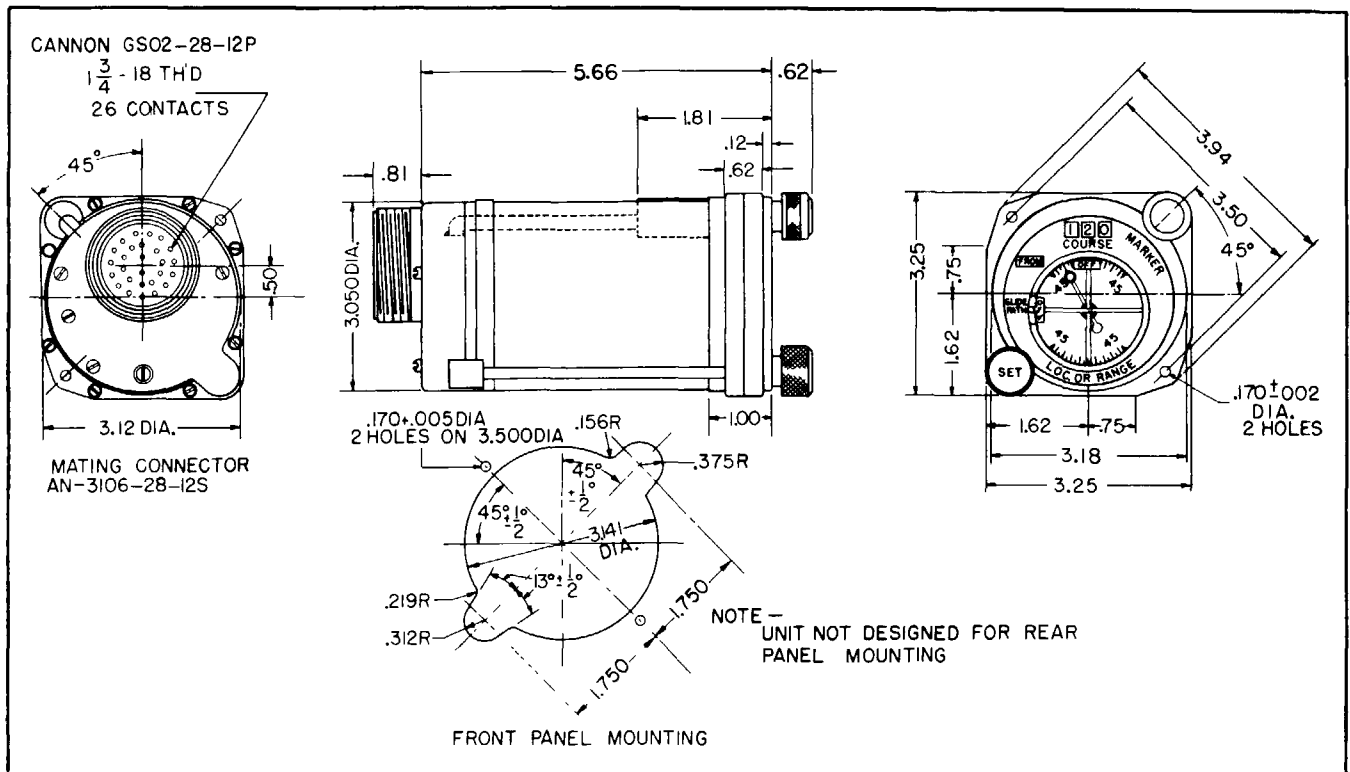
Course Indicator ID-249/ARN, Outline and Mounting Dimensions
